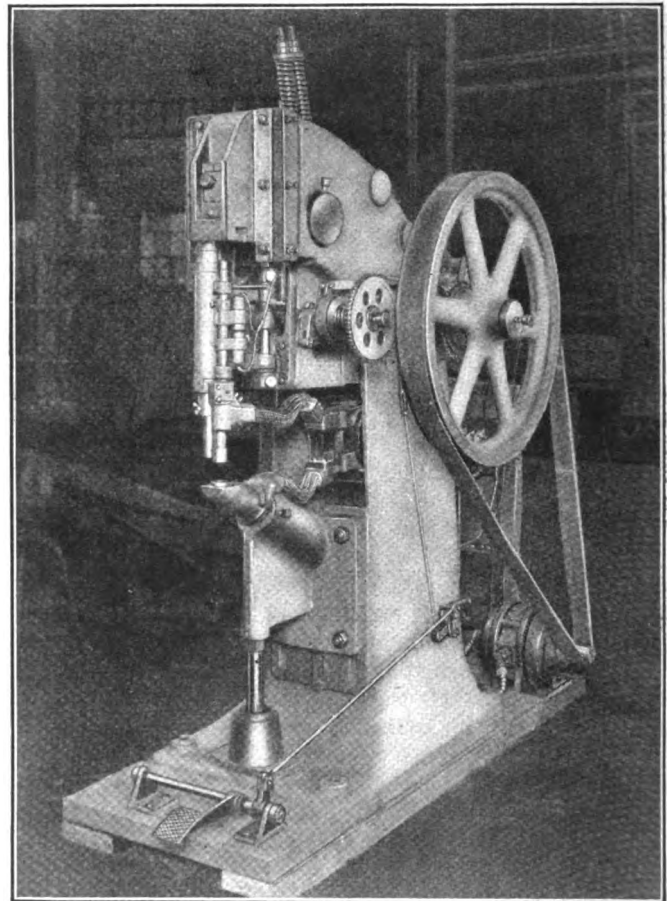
KOBERT TYPE-NB DUAL-HEAD ELECTRIC RIVETING MACHINE
